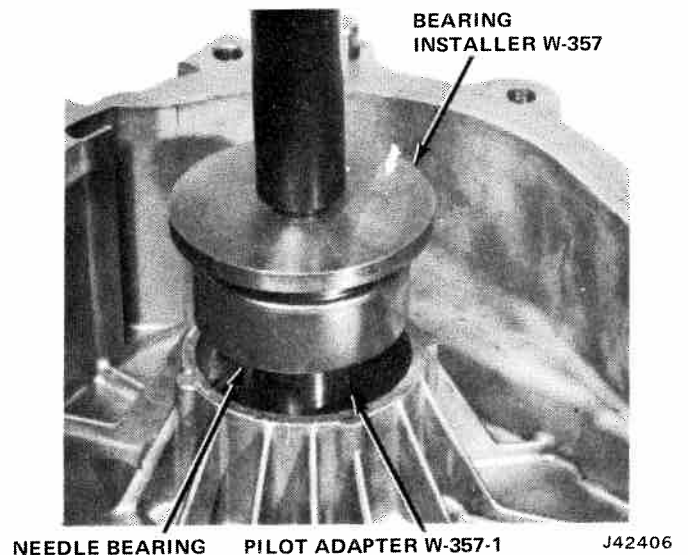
Installing Drive Sprocket Front Needle Bearing
